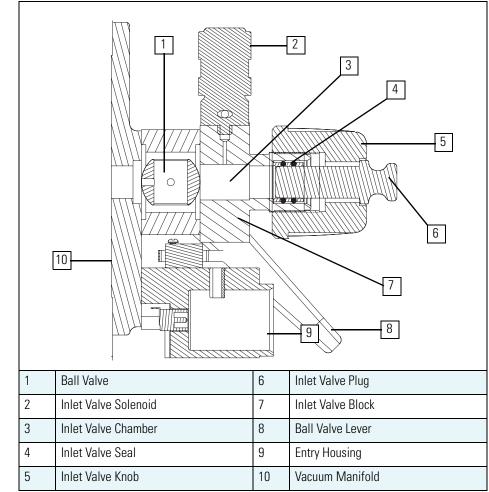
Inlet Valve Components (Left Side Cross Section)
